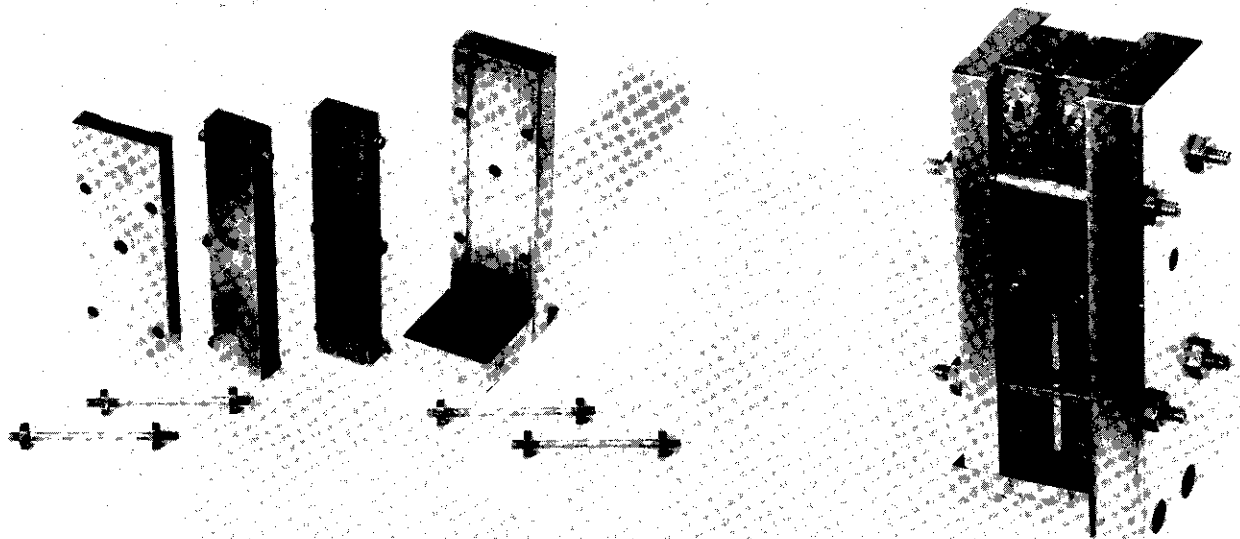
BALL BEARING GUIDE COMPRESSION JIG
